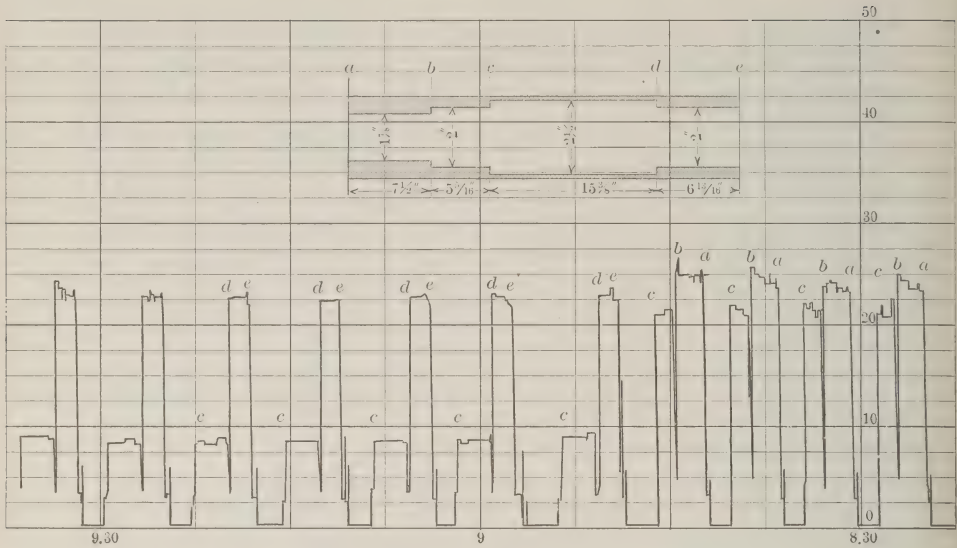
RECORD WHEN TURNING THE SHAFT SHOWN IN THIS DIAGRAM
